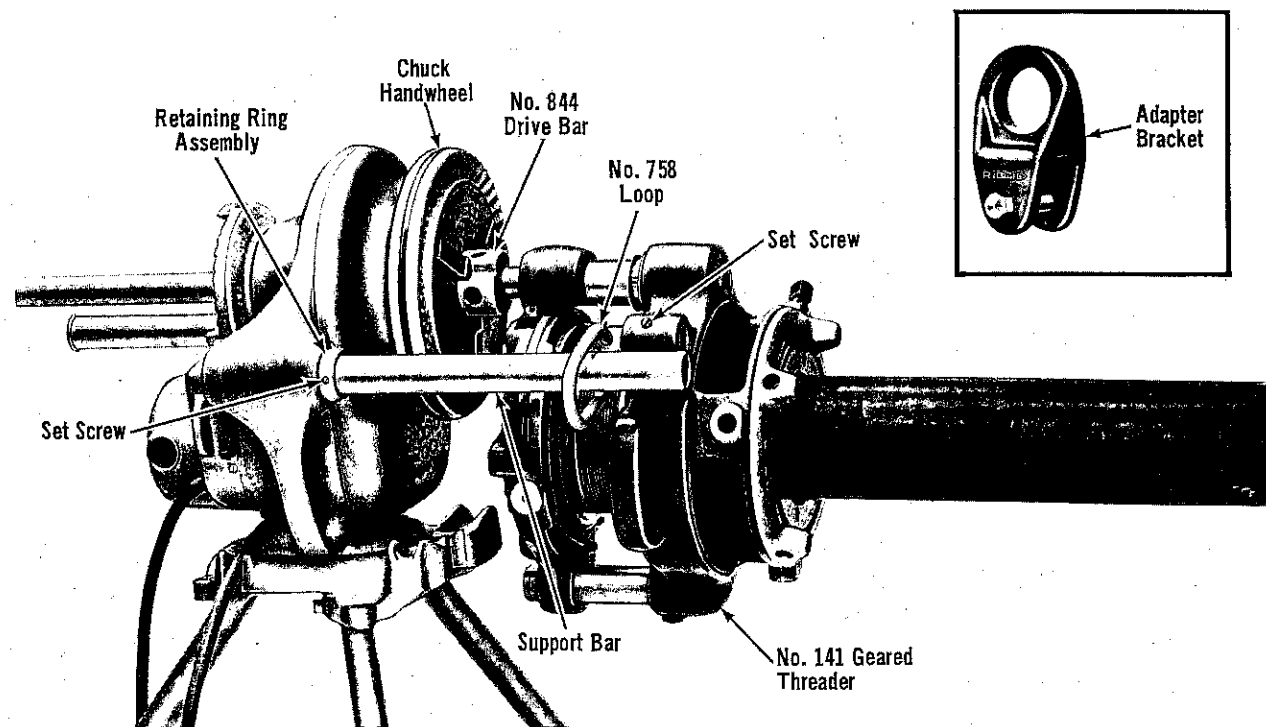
No. 141 Geared Threader Close-Coupled to Power Drive (No. 4PJ Threader Similar).
